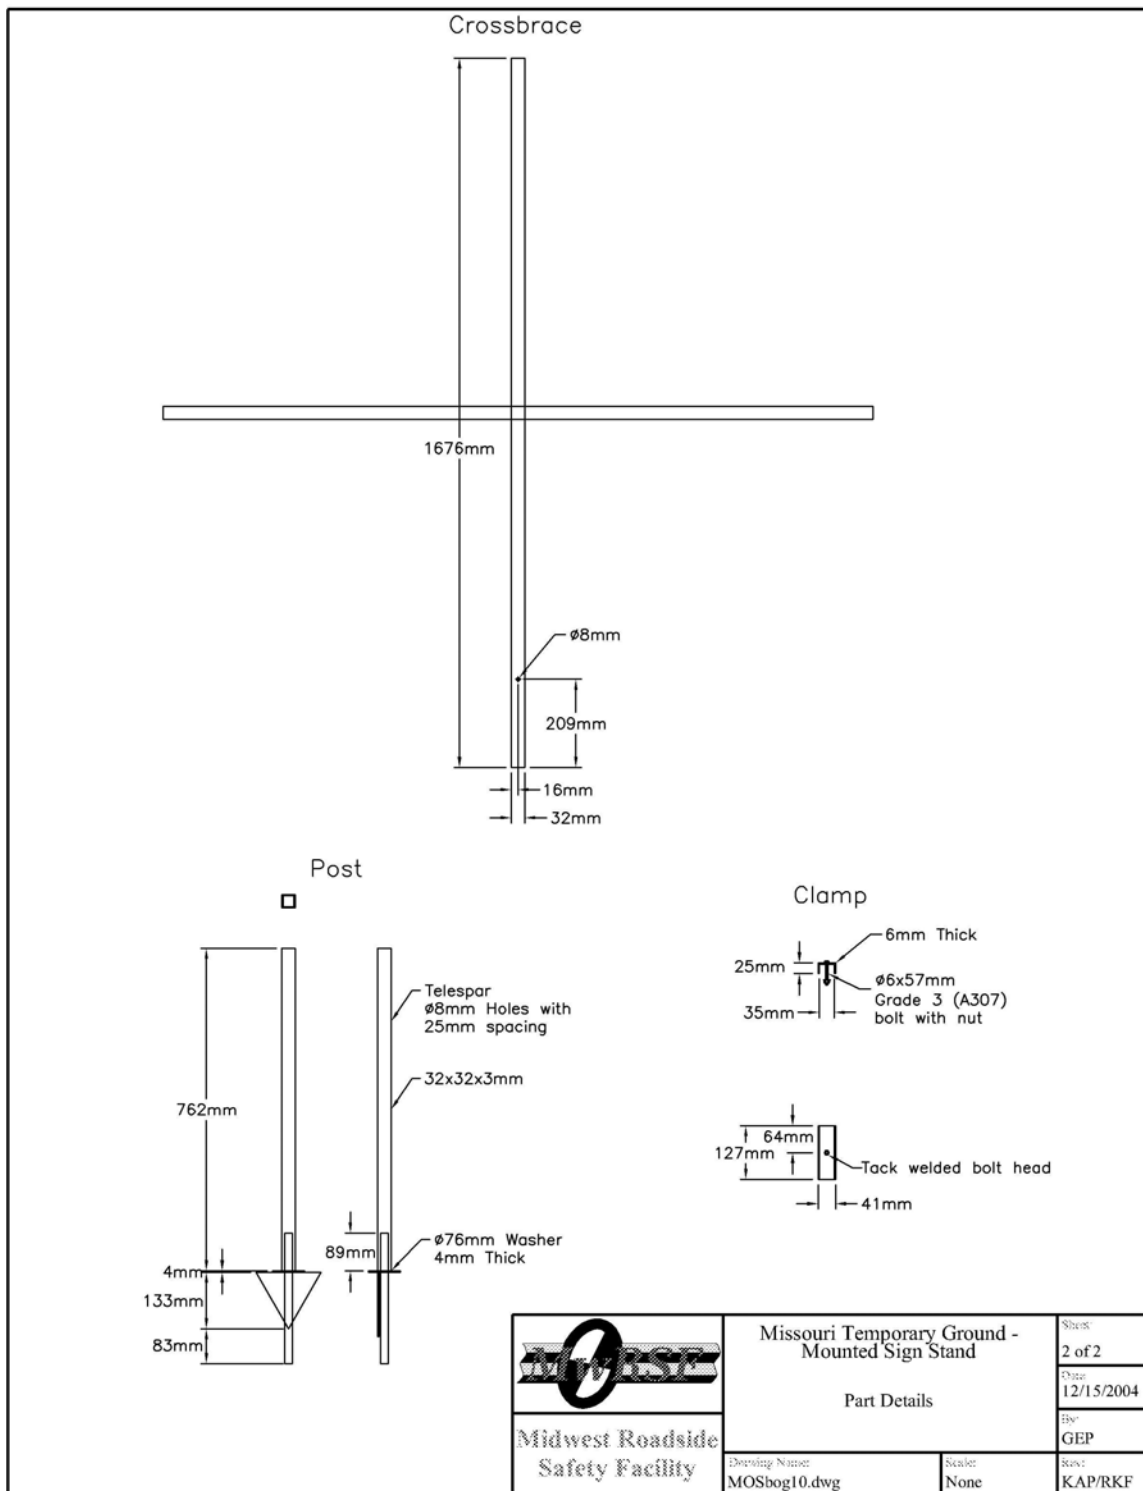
Ground-Mounted, Single-Post Sign System Design Details, Bogie Test MOSBOG-10
